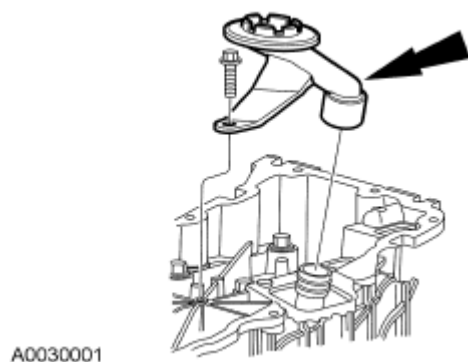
Locating Oil Pump Screen Cover And Tube Bolt
